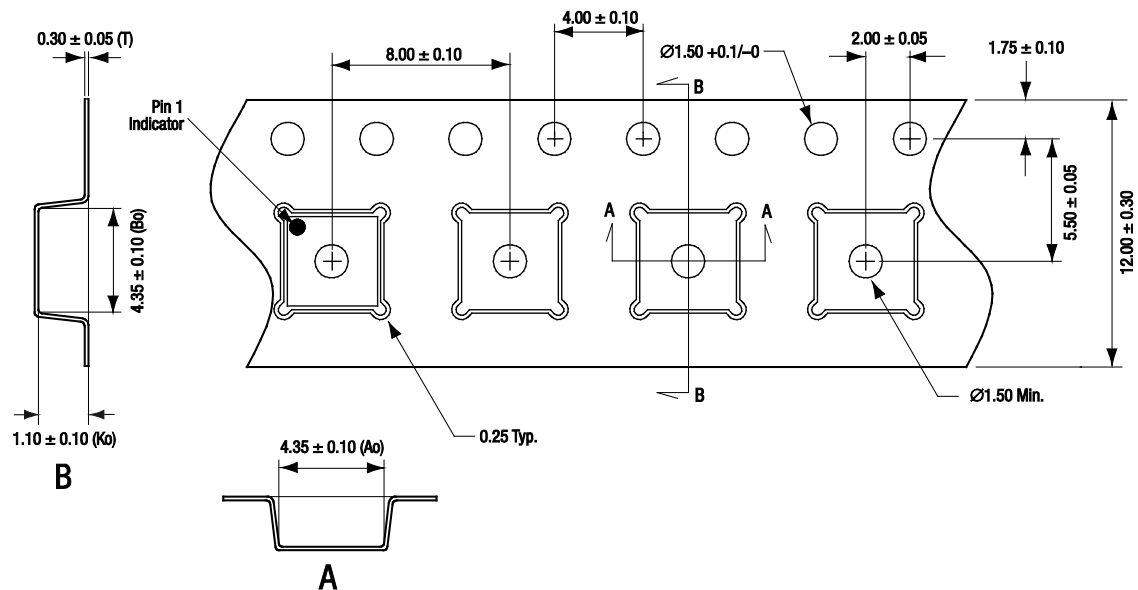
SKY12347-362LF Tape and Reel Dimensions
